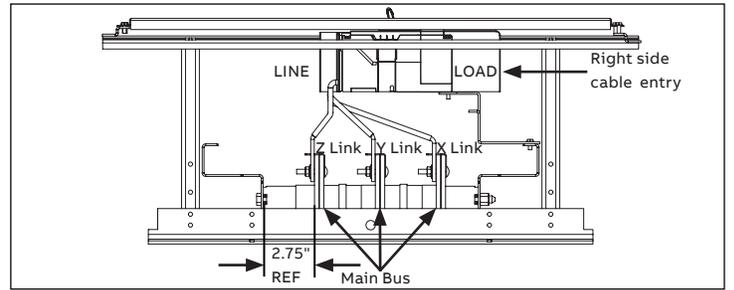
Single branch, XT4 Breaker; Right side cable entry, Assembly end view
